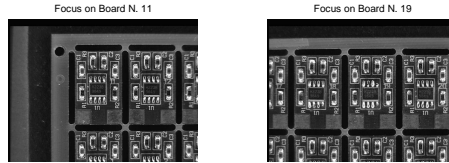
A shot view of the CCD camera moving to the board 11 (Left: No defect), and to the board 19 (Right: with Defect at the right solder joins of the chip)
